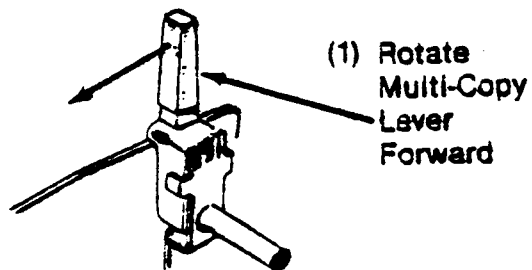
PLATEN DRIVE IDLER GEAR ADJUSTMENT
